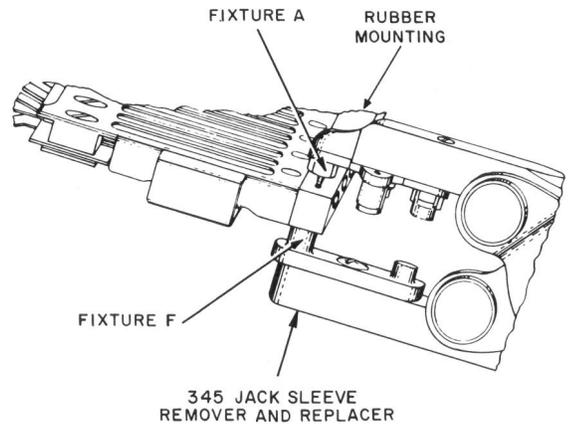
Method of Removing Sleeve Pin on 92-, 229-, and 292-Type Jacks
